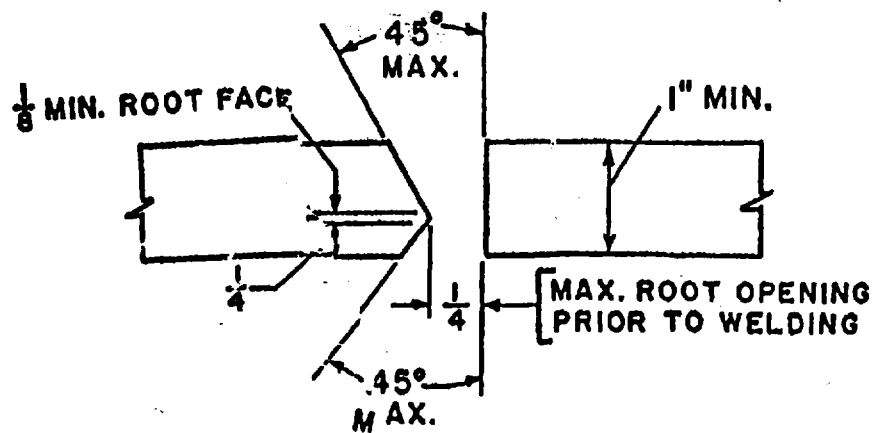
Groove weld test specimen for qualification of welders or welding operators for plate thickness of more than 0.5 in. (12.7 mm).
